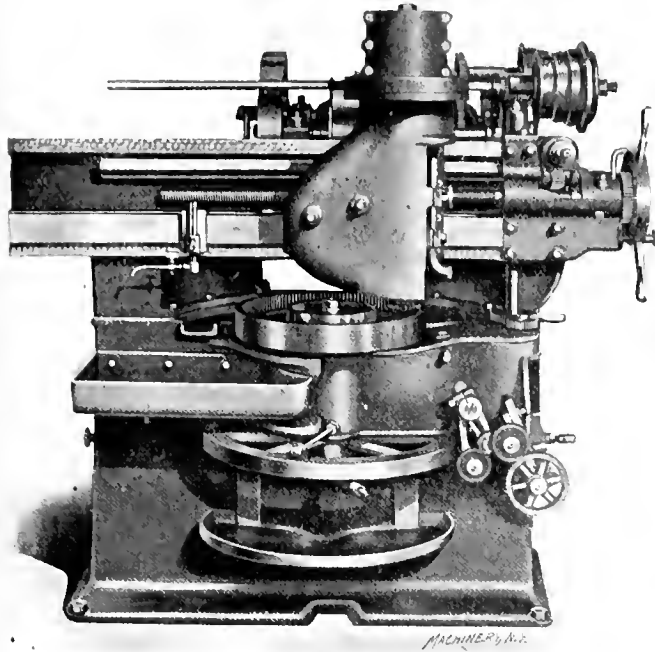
The Fellows 36-inch Gear Shaper at Work on an Internal Gear.
